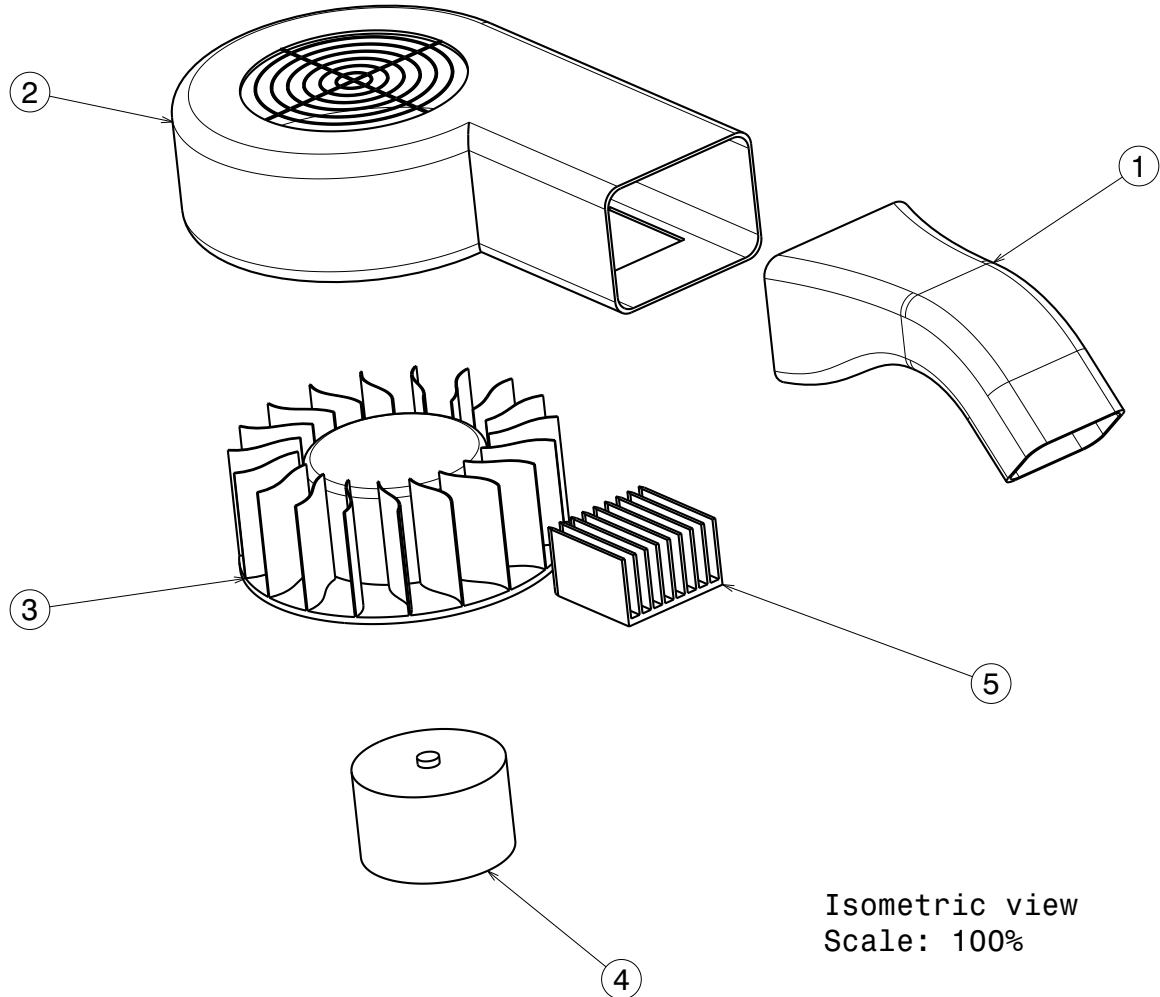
Exploded view of the blower assembly. Description of the balloon numbers is presented in Table 13.1
